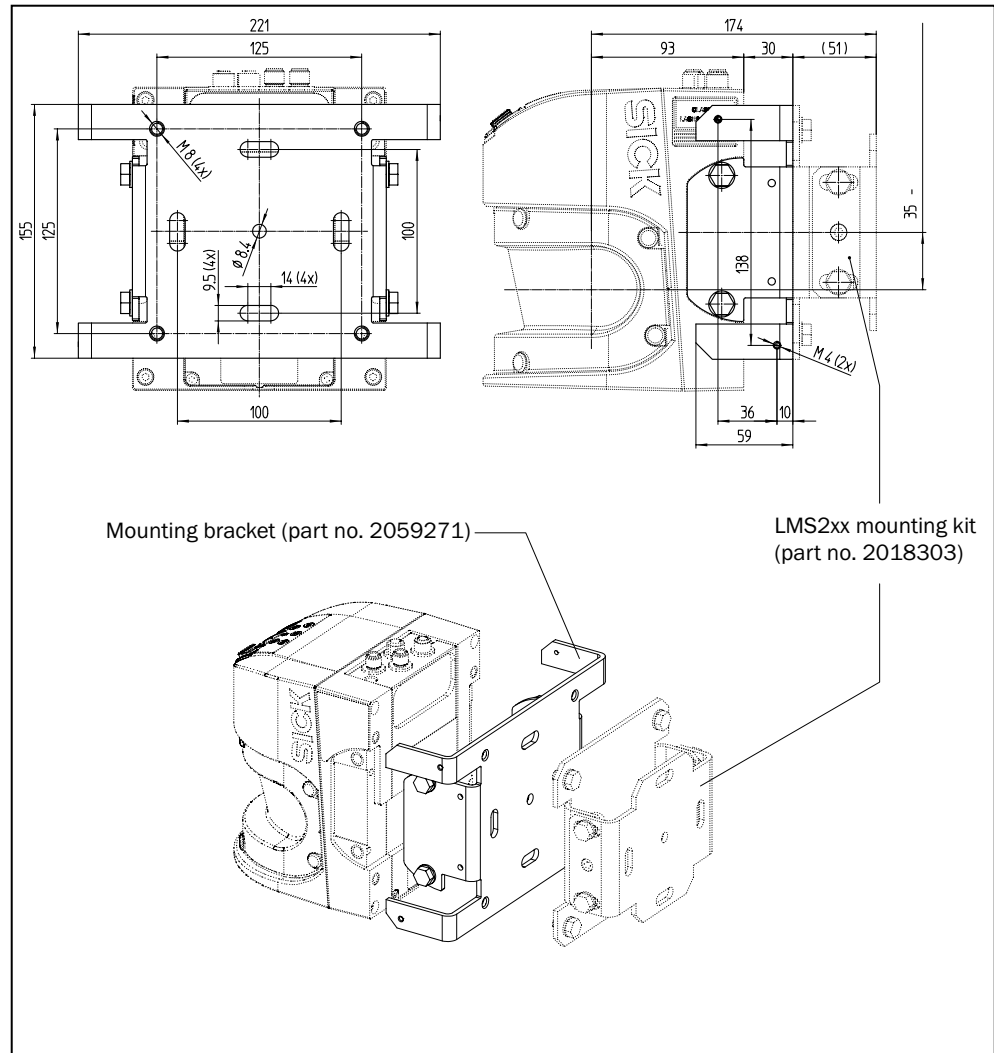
Dimensional drawing mounting bracket with mast bracket (mm)
